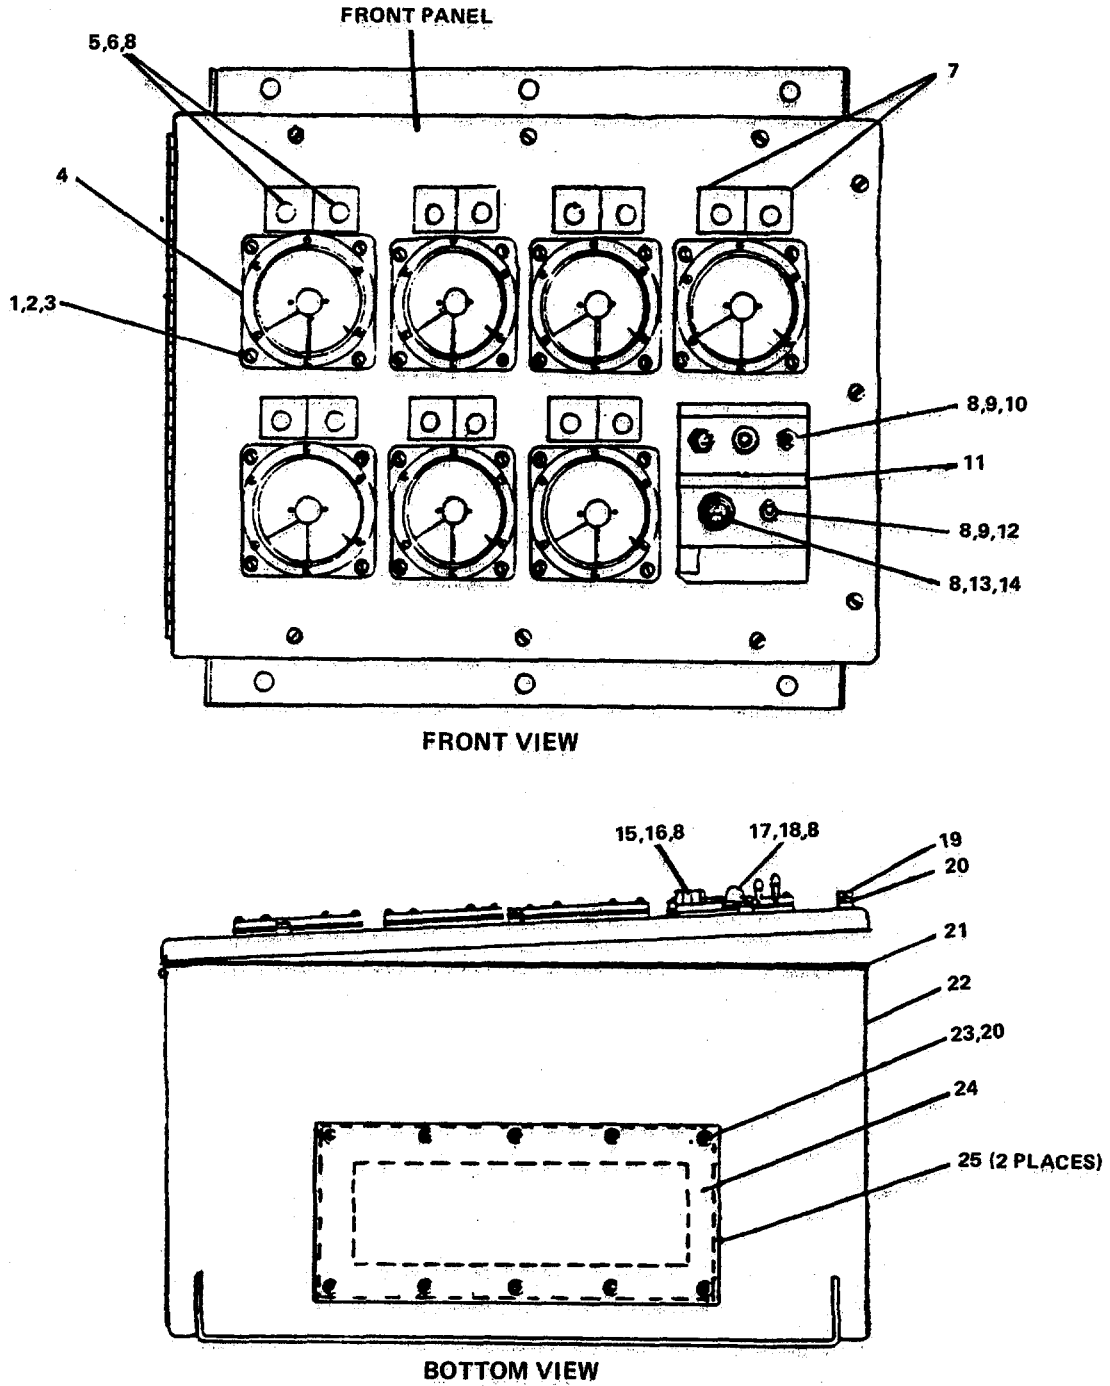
Receiver Module, RE-39240-7/M1-M7A-38100 (Sheet 1 of 4).
